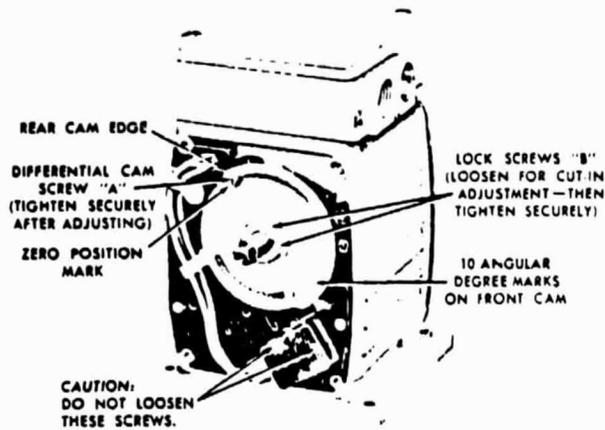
Interior view of motor actuator with auxiliary switch.
